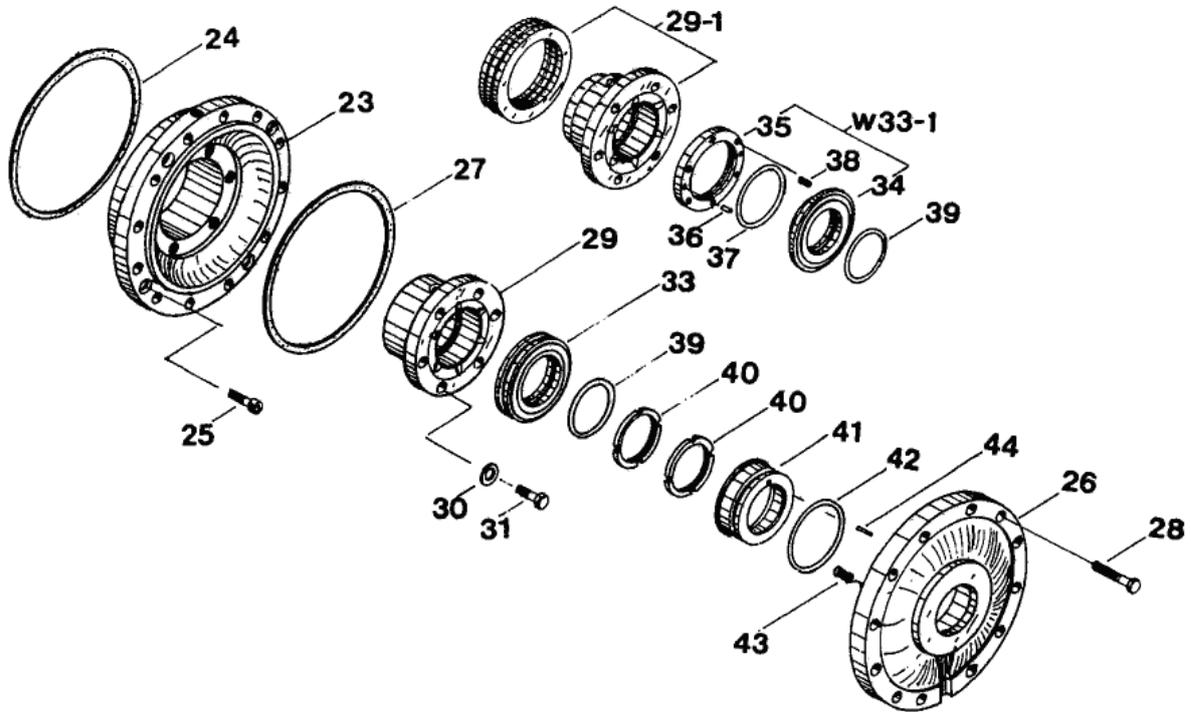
WA-type Shaft Seal and Thrust Bearing
